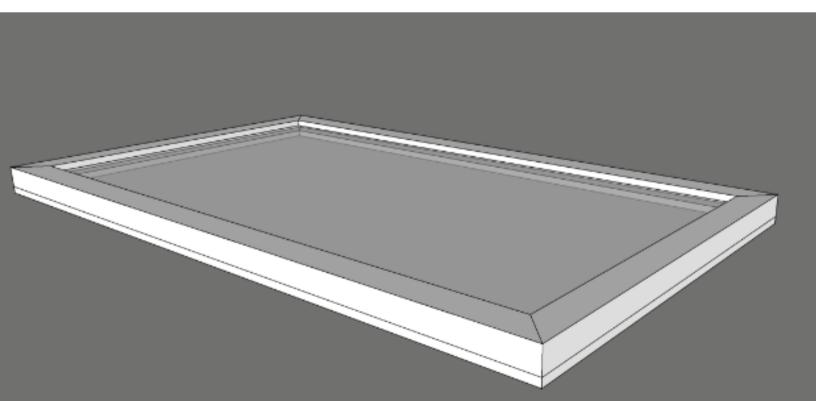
Sketchup of attaching acrylic to molding using screws
